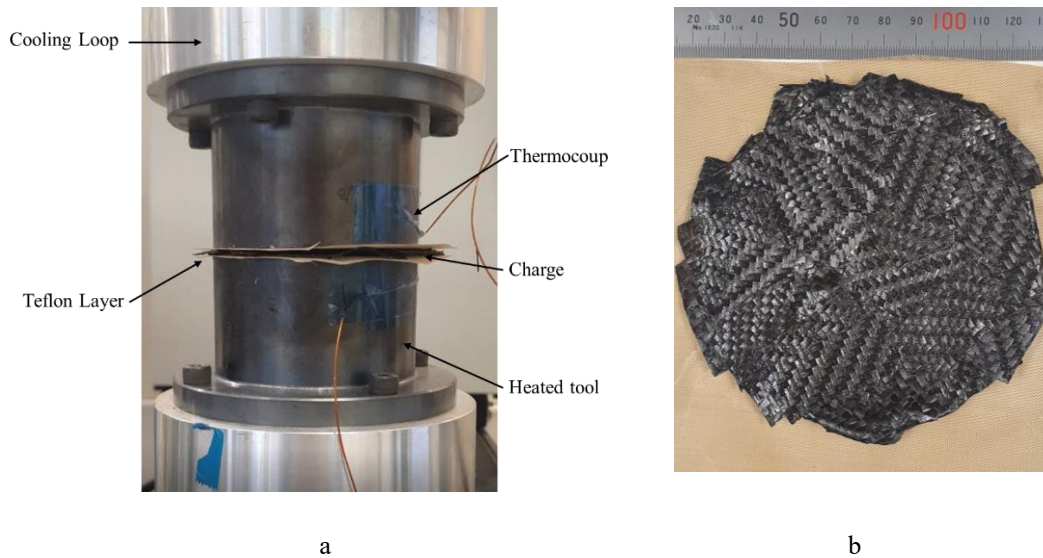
Squeeze Test set-up. a) detail of the fixture. The steel tools were anchored to the upper and lower steel fixture in which cooling loops are present. On the upper and lower tool face, a Teflon layer was placed. The thermocouples were placed on the upper and lower tool side surface; b) initial charge sample geometry.
